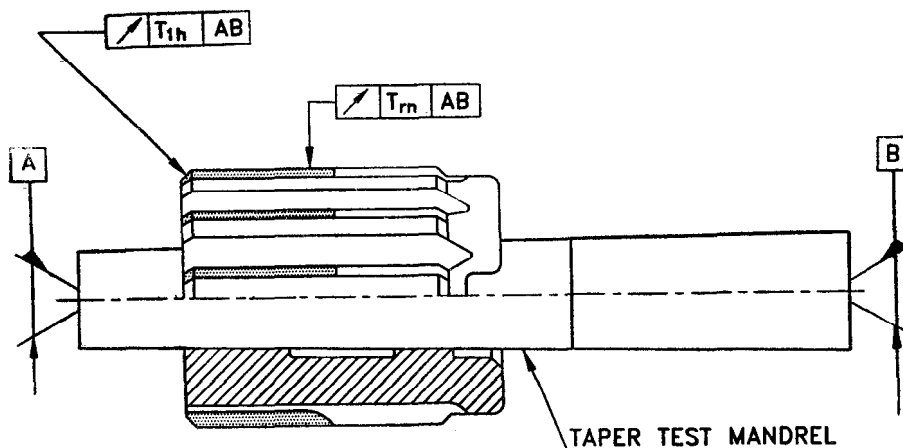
RUN OUT TOLERANCES FOR SHELL REAMERS
